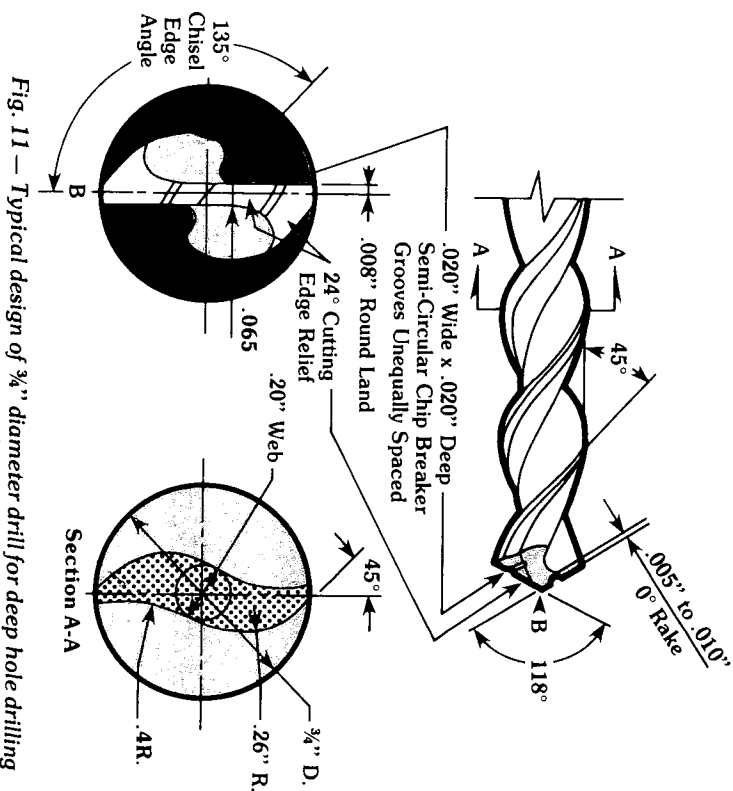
Typical design of 3/4" diameter drill for deep hole drilling magnesium.
